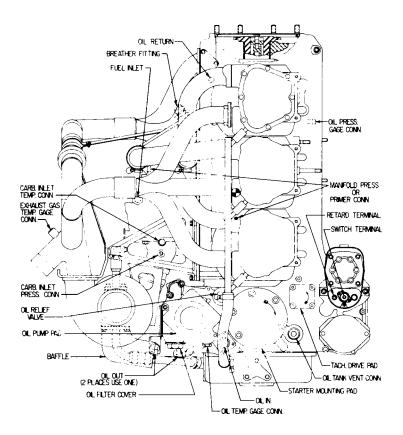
Installation Drawing - Right Side - TVO-435-D Series
